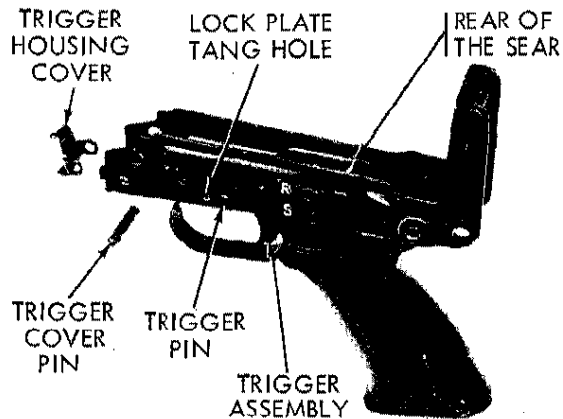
REMOVE TRIGGER AND TRIGGER HOUSING COVER
